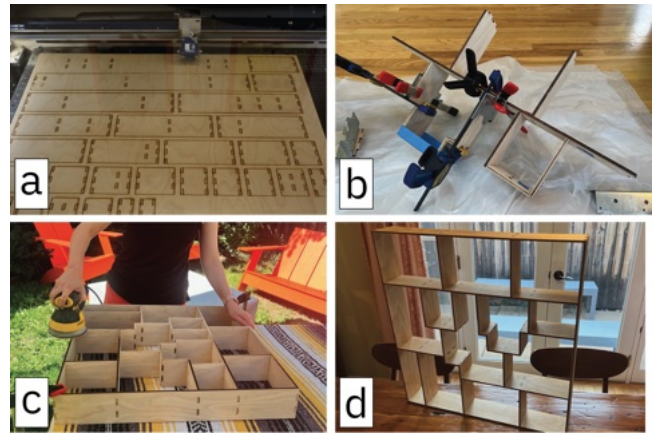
Fabrication and Assembly. (a) Shelves were cut on a laser cutter and (b) plywood shelves were secured with wood glue and clamped while drying in smaller subsections before gluing the entire shelving together. (c) Final finishes included sanding cut edges and finishing with an oil-based sealant before (d) the final shelving was installed.
